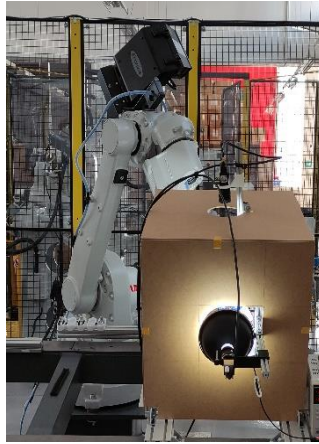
Inspection workplace with robot arm holding the checked product on double upper and side camera view
